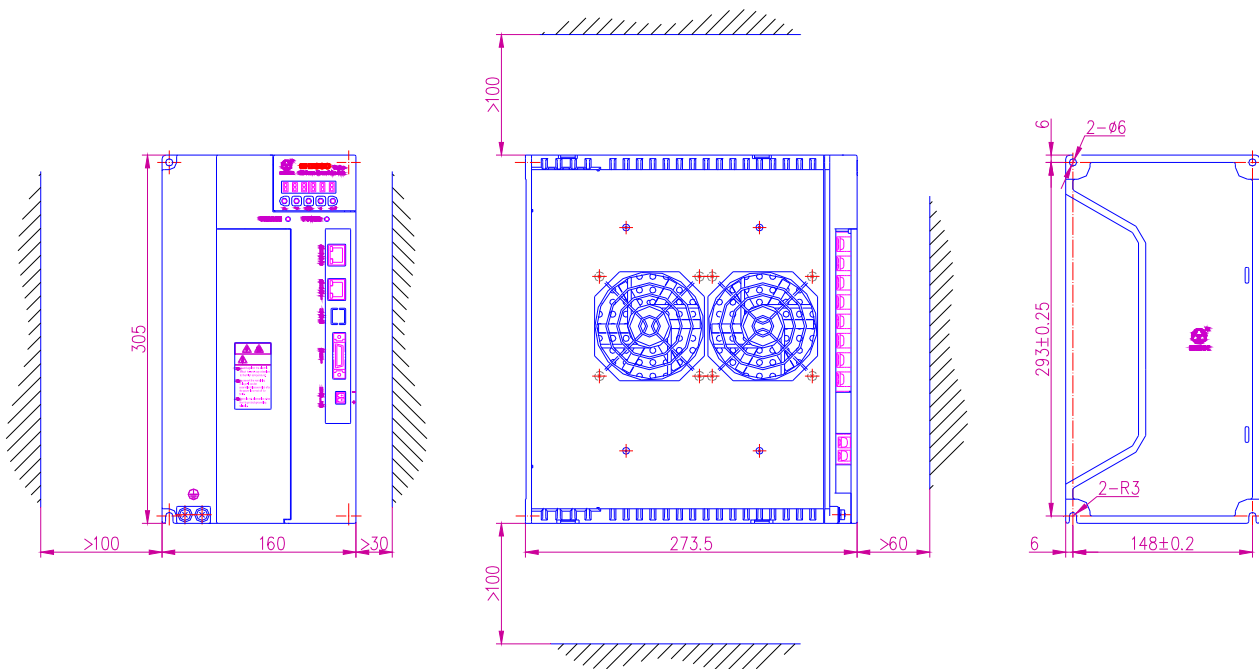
GH3100 installation dimension (Unit: mm)
